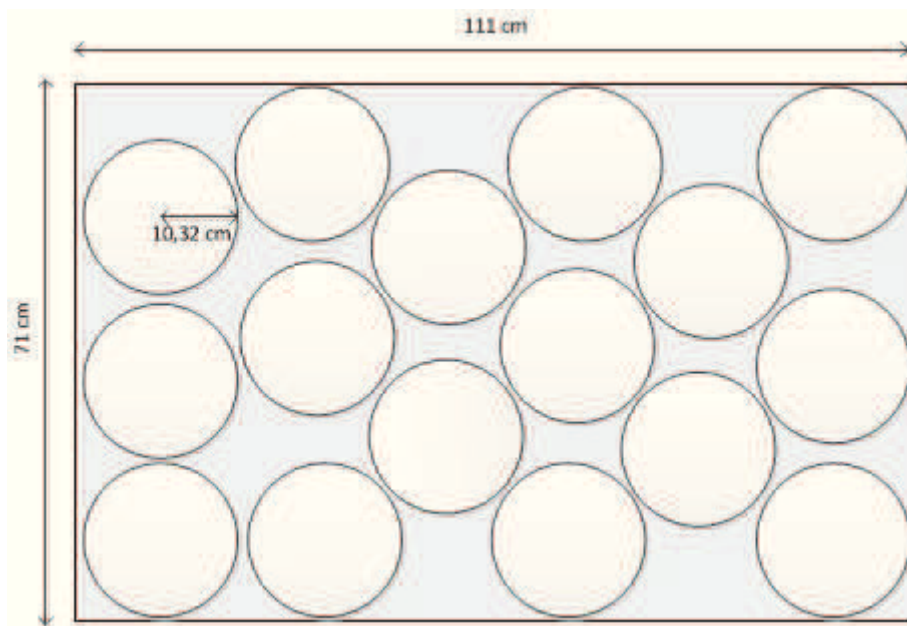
Proposal of a new layout for place the parts inside the Large Load Carrier.
